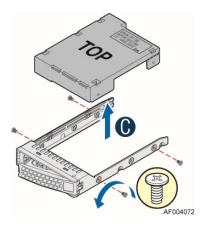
3.5" Hard Disk Drive Installation – Remove the drive blank
